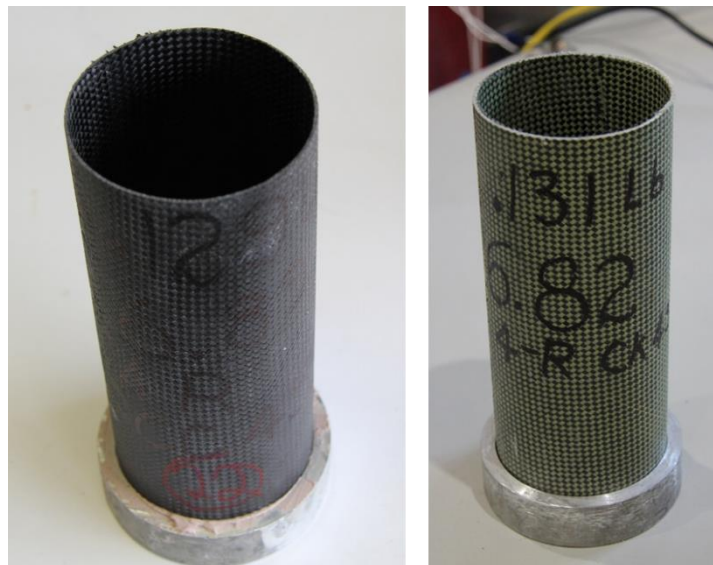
Composite tube specimens. Traditional carbon (left) and hybrid carbon/aramid (right) weaves
